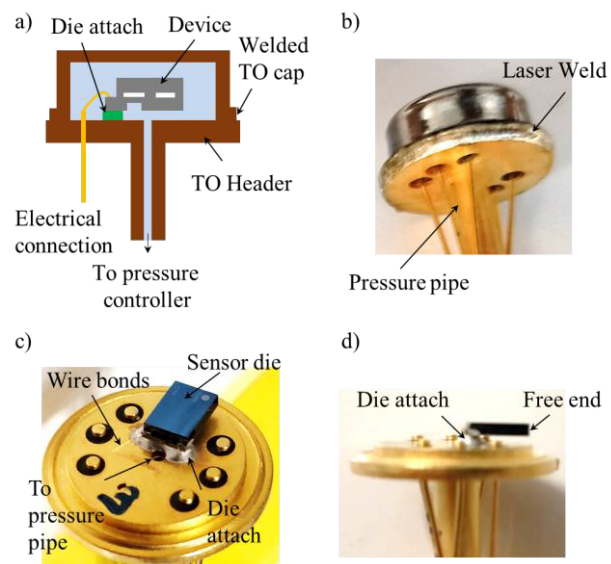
Packaging of sensor for high pressure characterization: a) Packaging concept, b) Welding seam of cap attached to TO header, c) die assembled on a TO header, d) side view of the suspended sensor die on a TO header.
